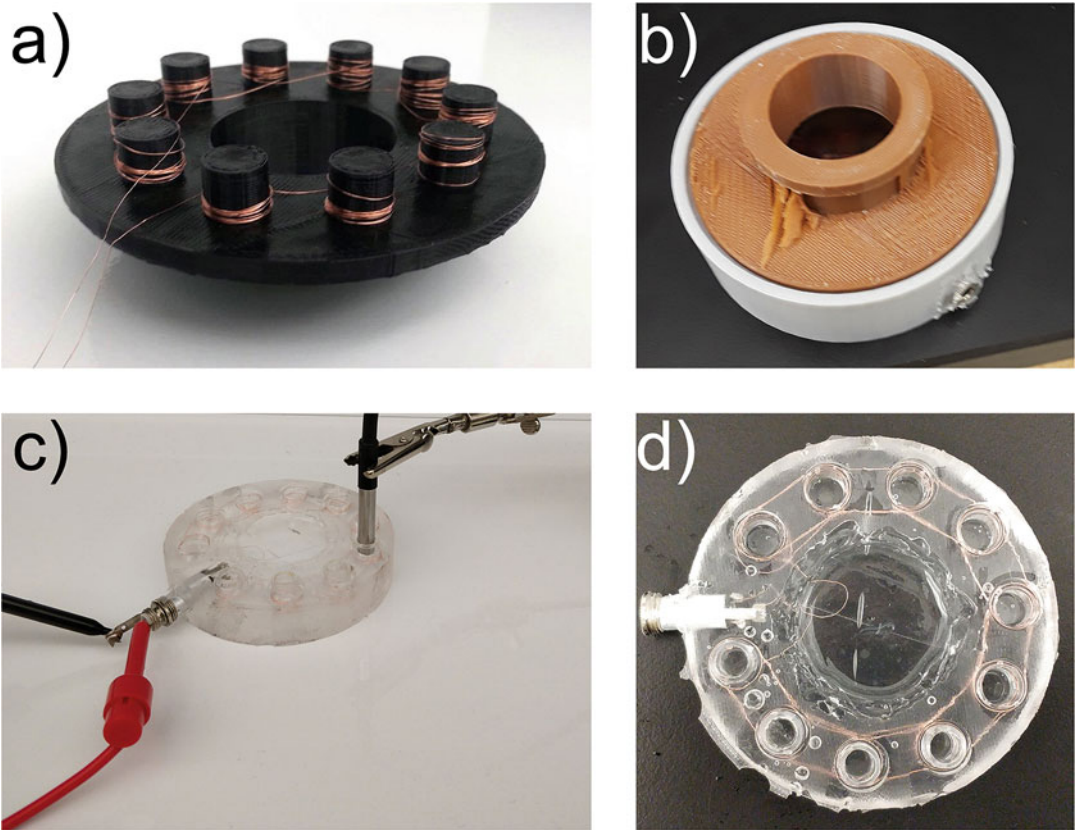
Heater fabrication: (a) 3D-printed mold with copper wire wrapped around the protrusions for individual well heating, (b) assembled 2-part mold, (c) PDMS heater testing (side view), (d) PDMS heater (top view)
